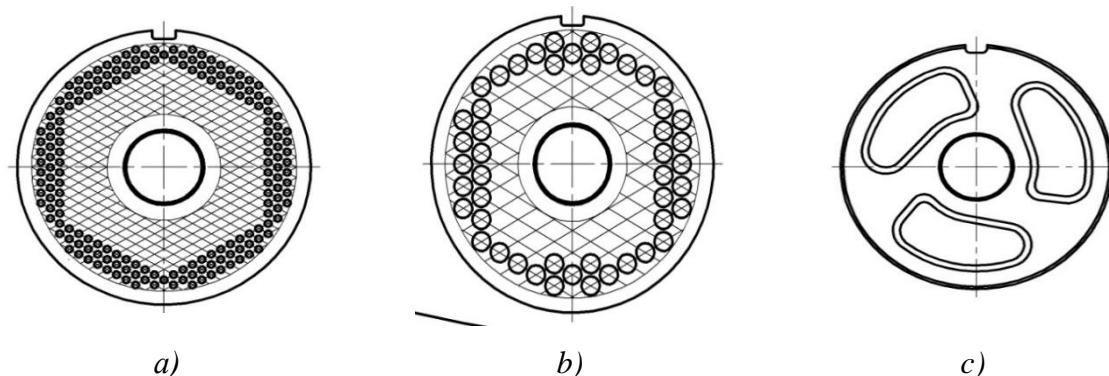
Grinder grates for different types of meat grinding: a – thin grinding; b – fine grinding; c – medium grinding
